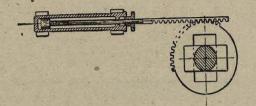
Locking arrangement of Tannett-Walker Adjustable Press.
